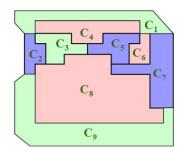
Test assembly to illustrate multiple selective disassembly problem
